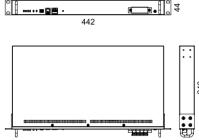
Appearance & Mechanical Drawing of 48NPFC10
